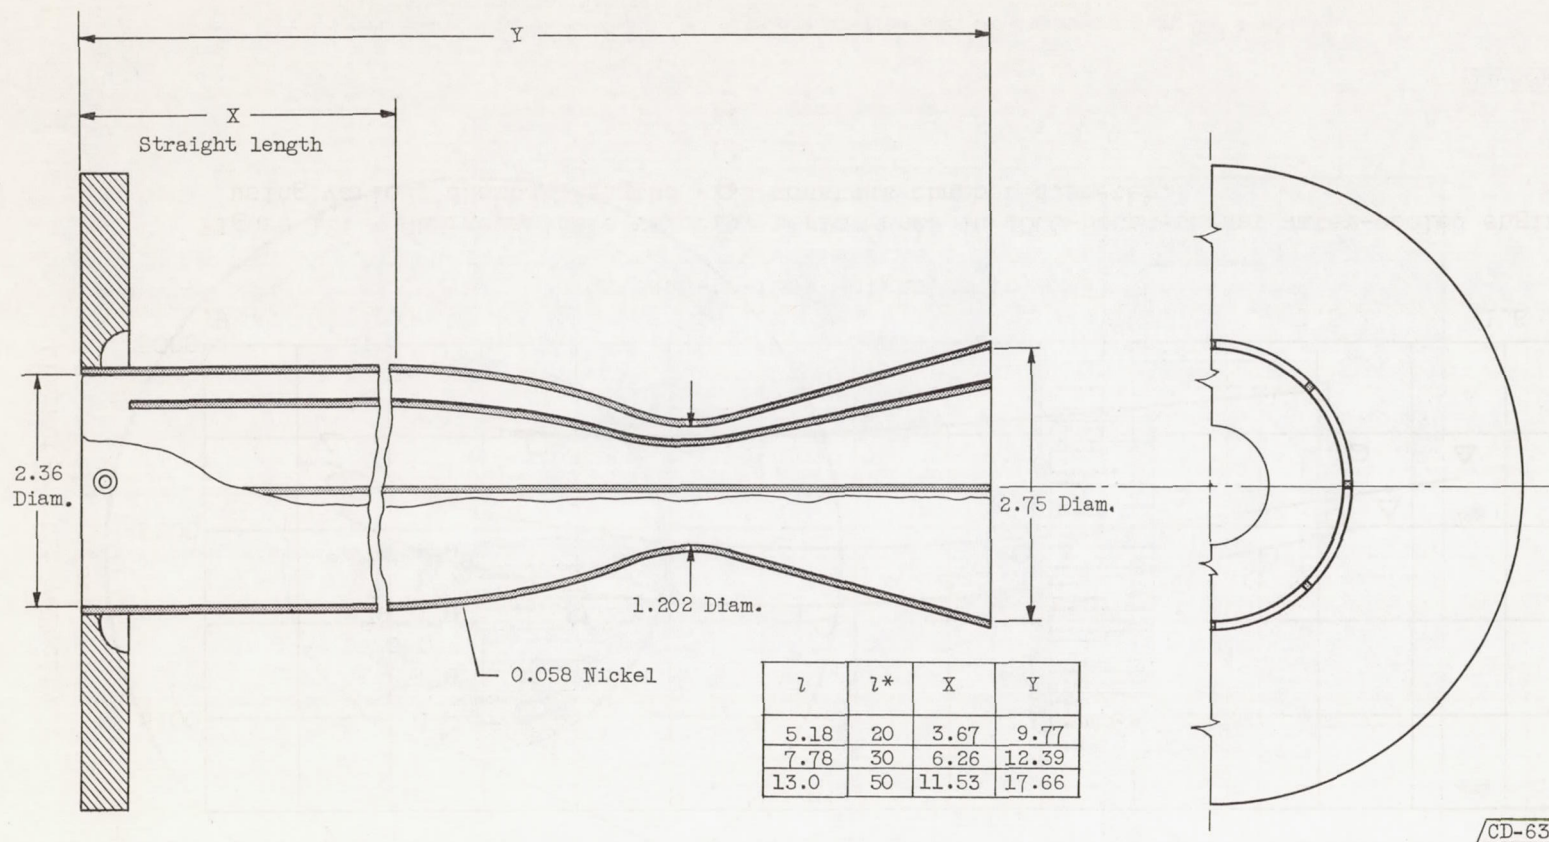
Chamber for 1000-pound-thrust water-cooled engine. (All dimensions in inches.)
